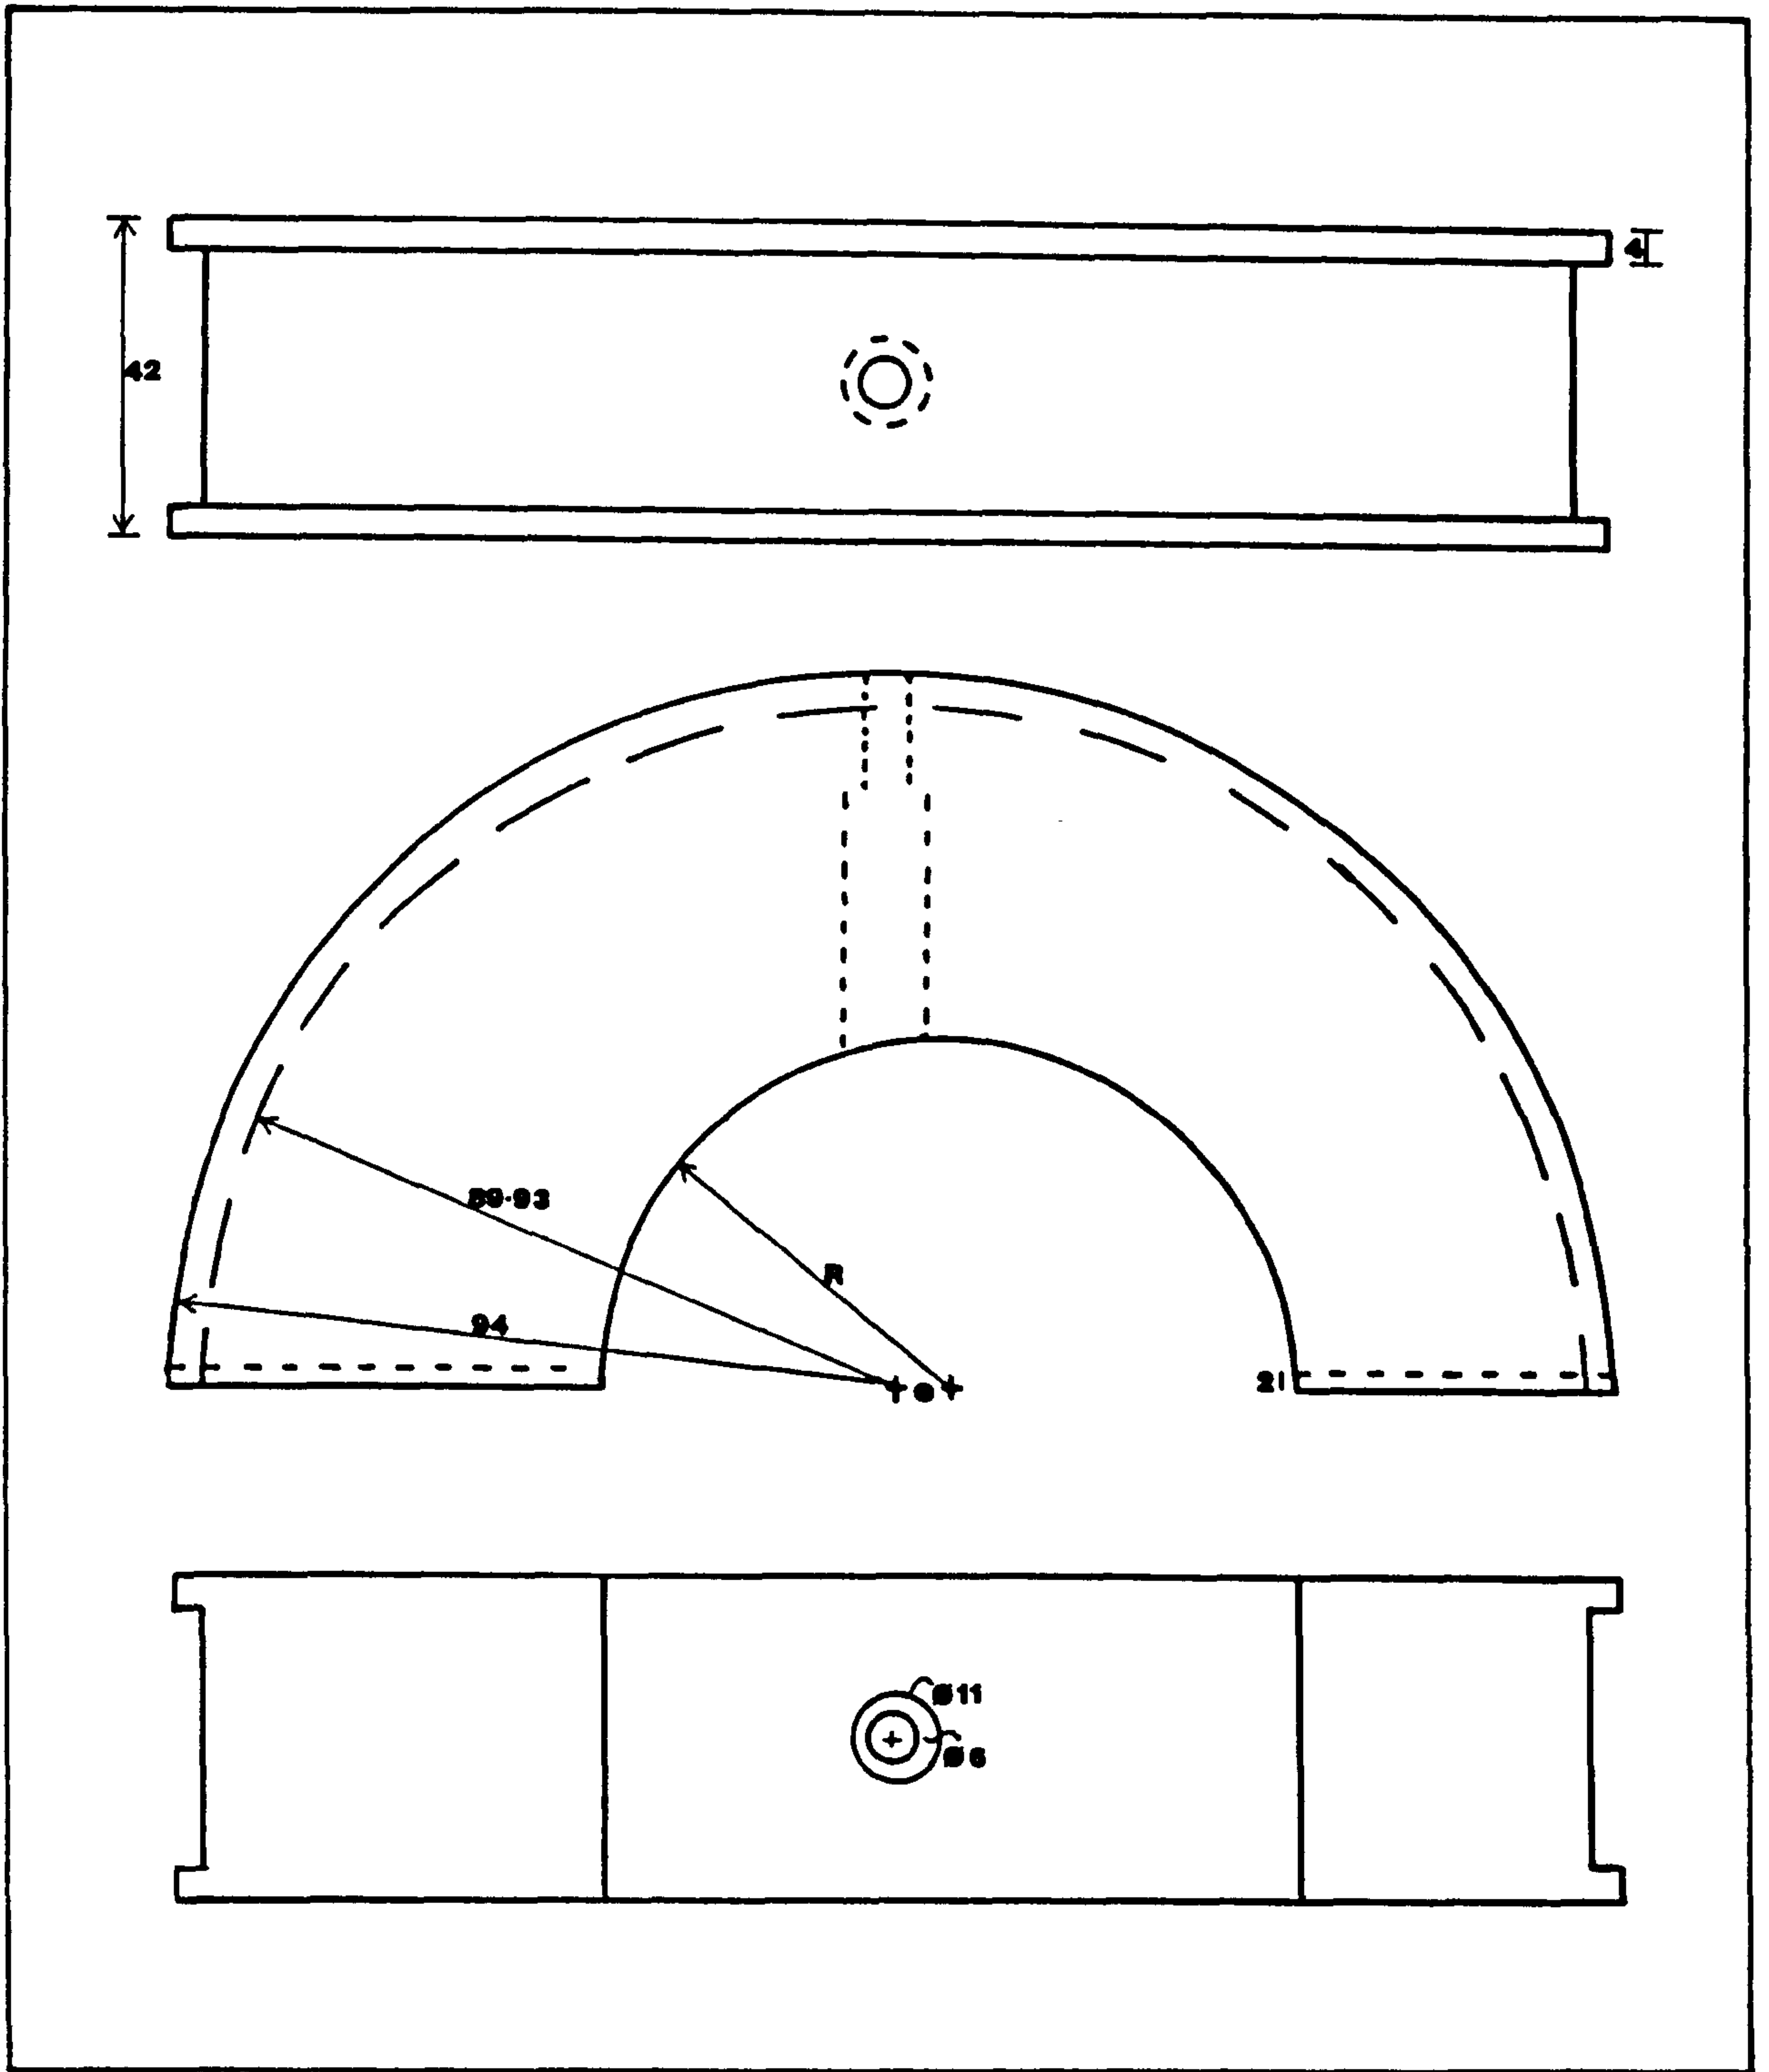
Axial offset of the insert for Haxey MK II Butt Welding Machine. Diagram showing the top segment of the misaligned insert set.
